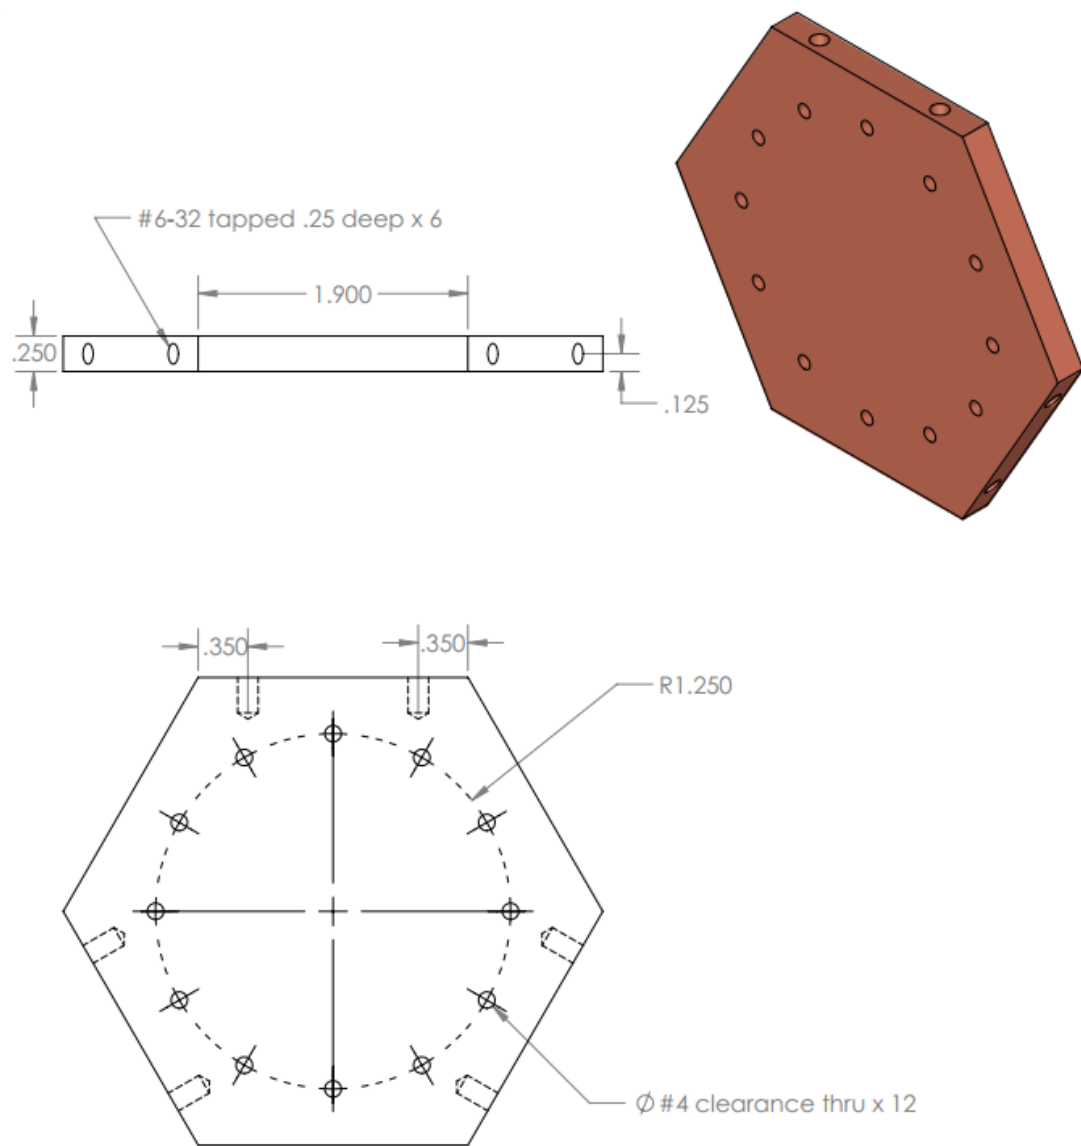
Vertical piece that fixes coaxial feedthroughs, soldering pins, and the sample positions.
